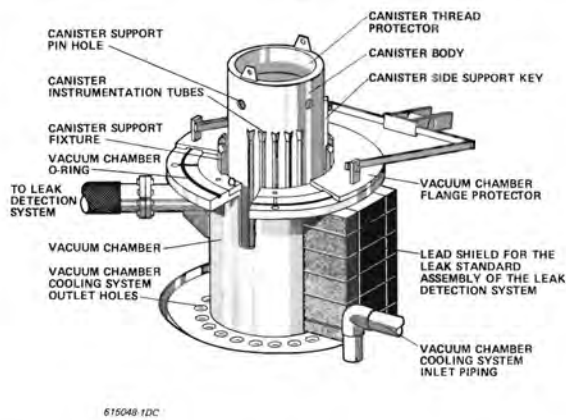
Weld Pit With Empty Canister Arrangement
